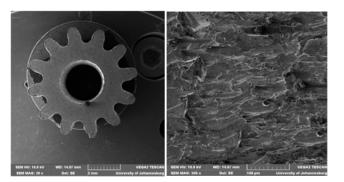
SEM Micrographs of abrasive water jet machined miniature gear [1]
